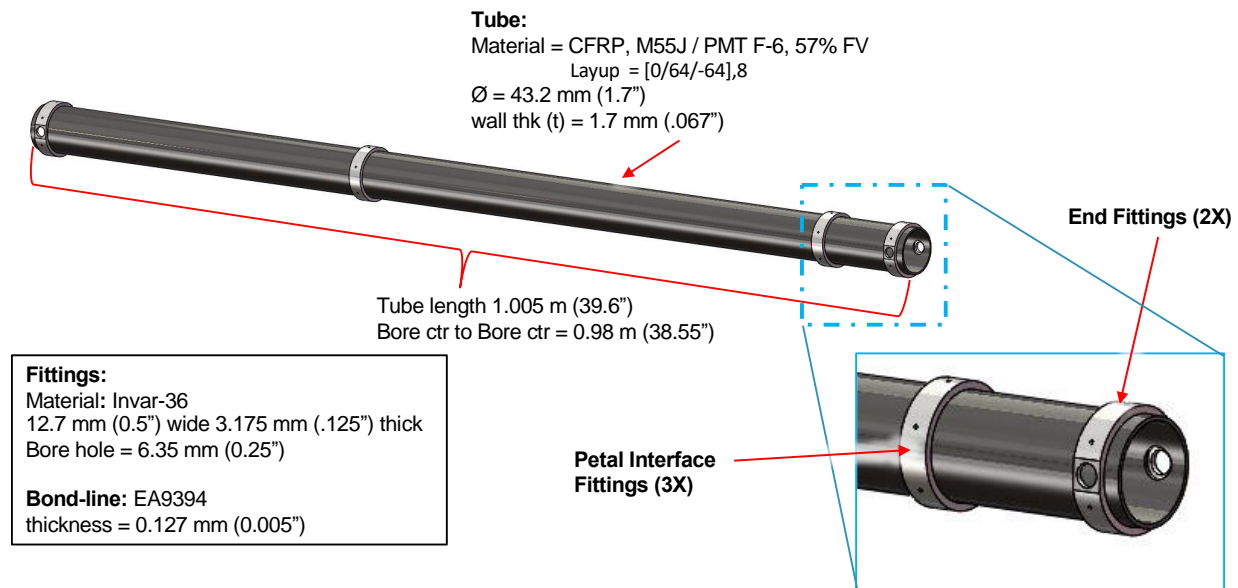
Longeron assembly test article final detailed design includes all necessary fittings in the critical dimension load path.
